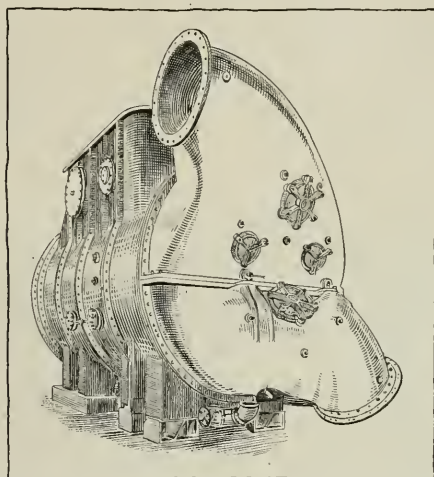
END VIEW OF A BRITISH-BUILT CONDENSER, SHOWING INLET AND OUTLET WATER BOXES
